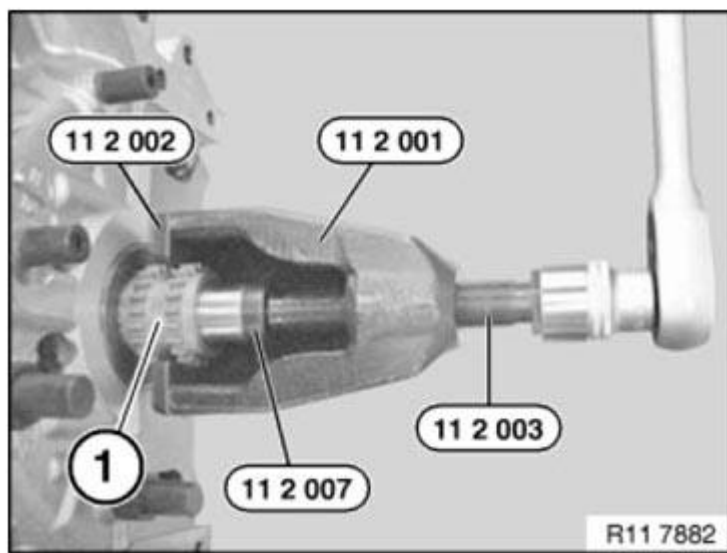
Removing Sprocket Wheel With Special Tool 11 2 003
